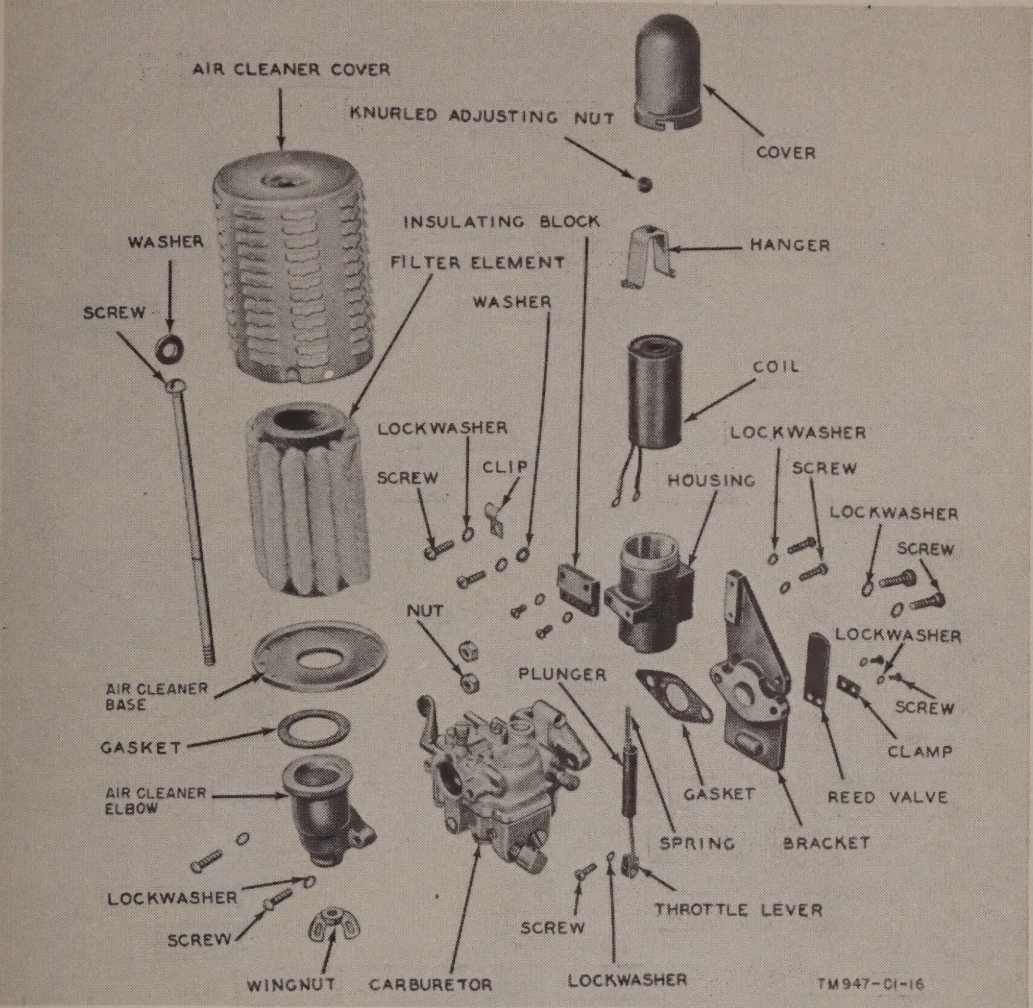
Power Unit PE-210-B, governor, carburetor, and air cleaner, exploded view.
